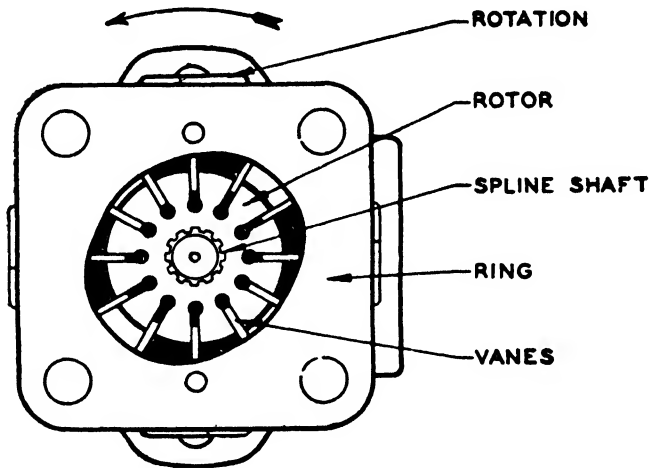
End view of vane-type oil pump with oval ring and rotor with sliding vanes. (*Vickers, Inc.*)
